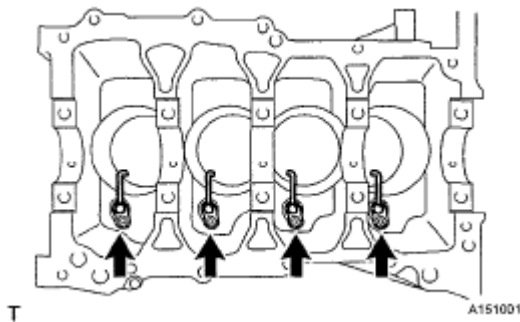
Locating No. 1 Oil Nozzle Sub-Assembly
